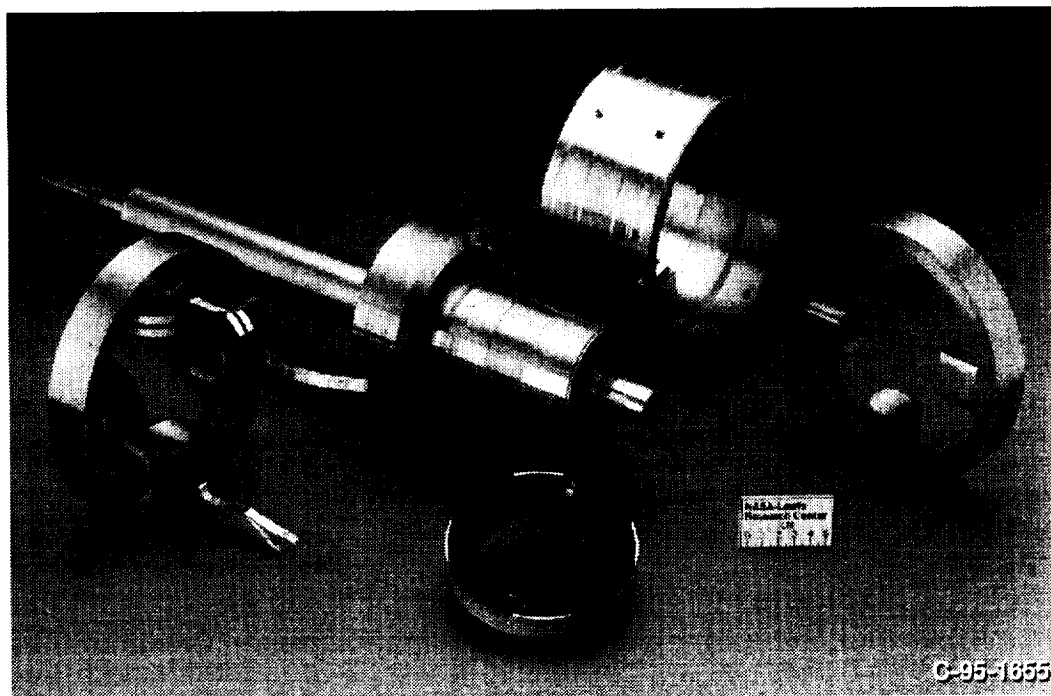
Components of high-temperature superconducting magnetic bearing.
